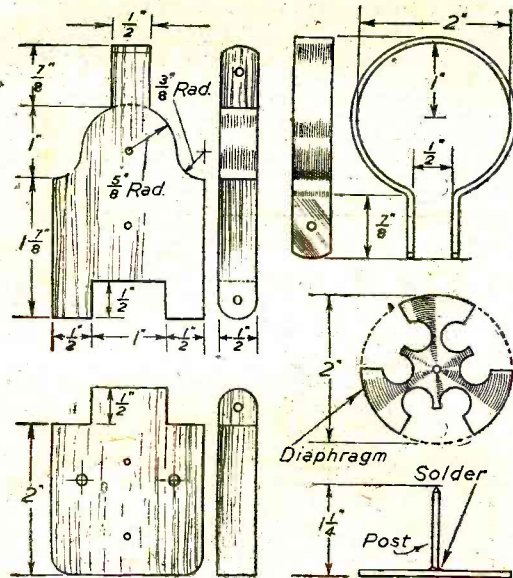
Upright support and base pieces, with details of earphone clip and special type of diaphragm.
